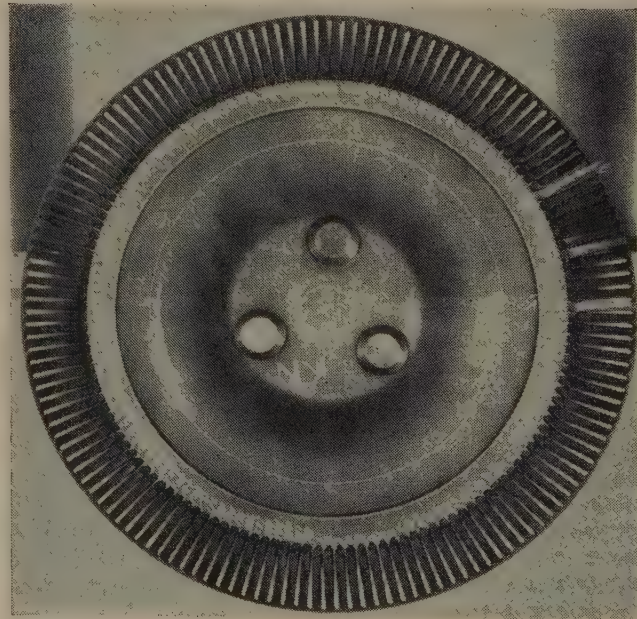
TEST ROTOR NO. 1, CONTAINING BLADES OF TWELVE ALLOYS
